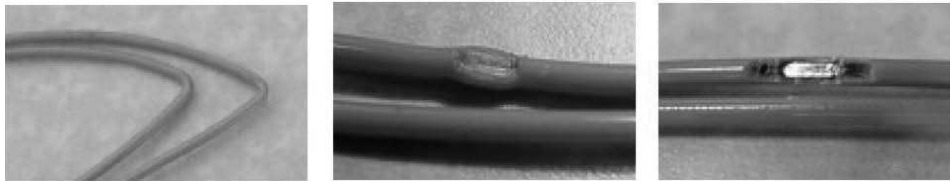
Typical failures of fibre optic cables: bending, damage of sheath, damage of fibre [11]
